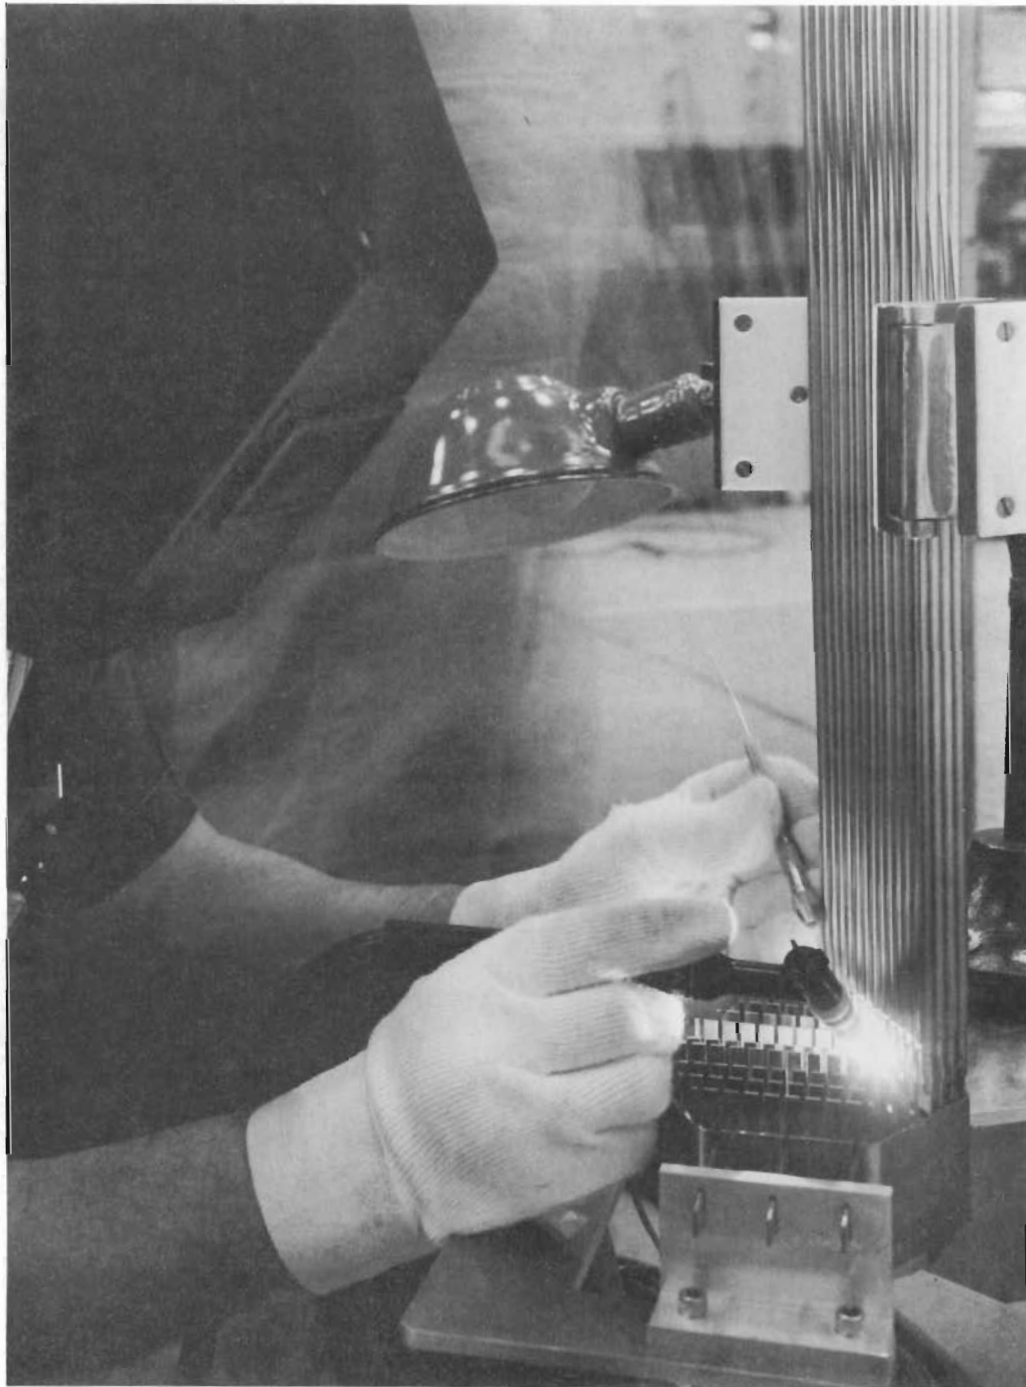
Welding Fuel Pin Row Grid Strips in Place
